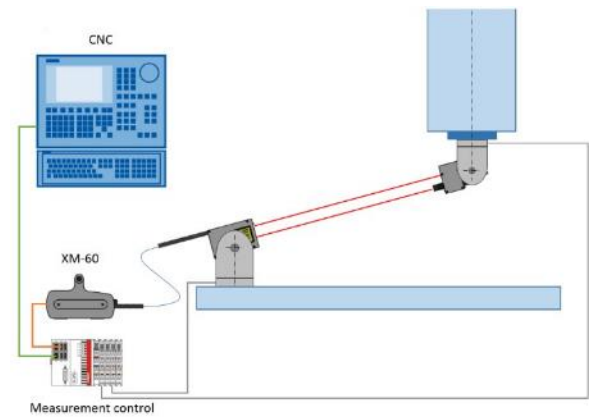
Measurement system concept. The launch unit is fixed in the machine tool workspace and the receiver unit is clamped to the spindle.
